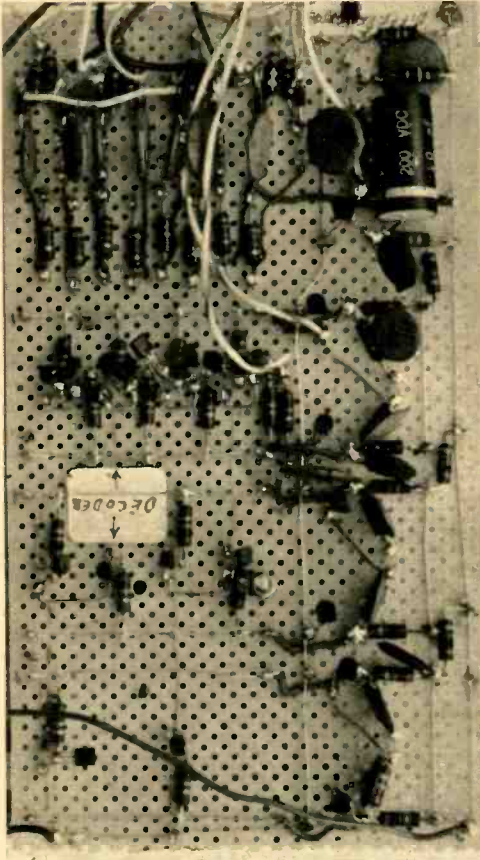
Tempo Generator and Binary Counters/Decoder and Differentiators. Pictorial of this board is in Fig. 10. Crowded parts will require careful wiring unless you want to build on larger board.
